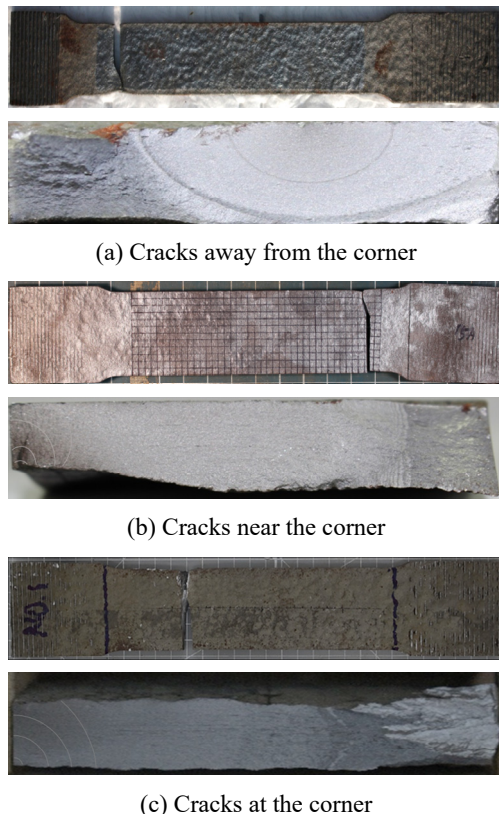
Corrosion surface and fracture surface after fatigue test
